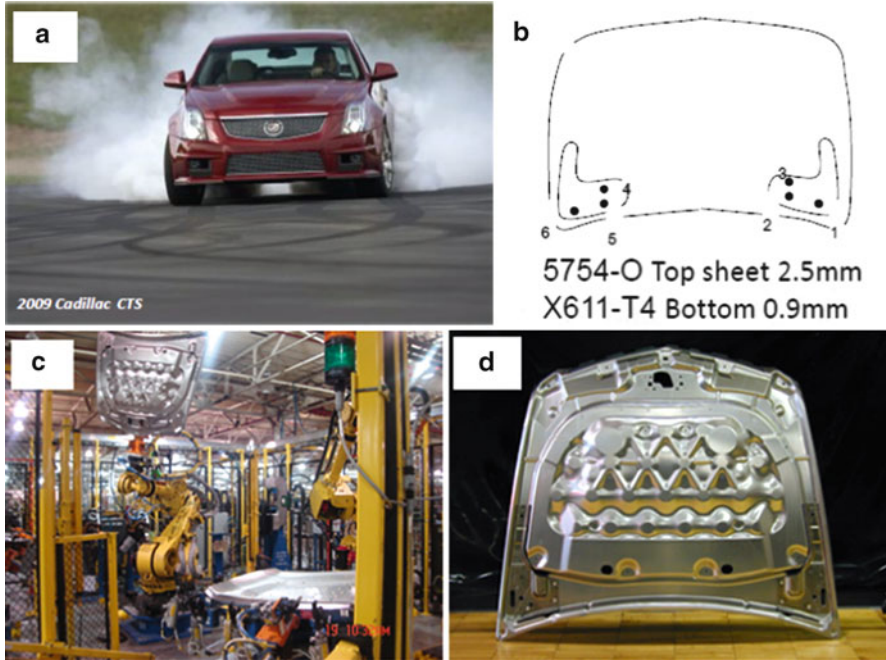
An example of friction stir spot welding used in automotive industries (Figure courtesy Dr. Blair Carlson, General Motors)
